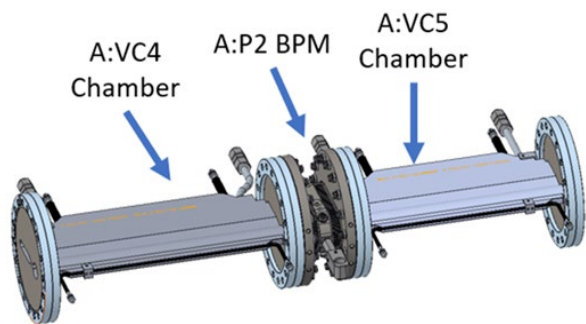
Vacuum system sub-assembly with two chambers and a BPM.
